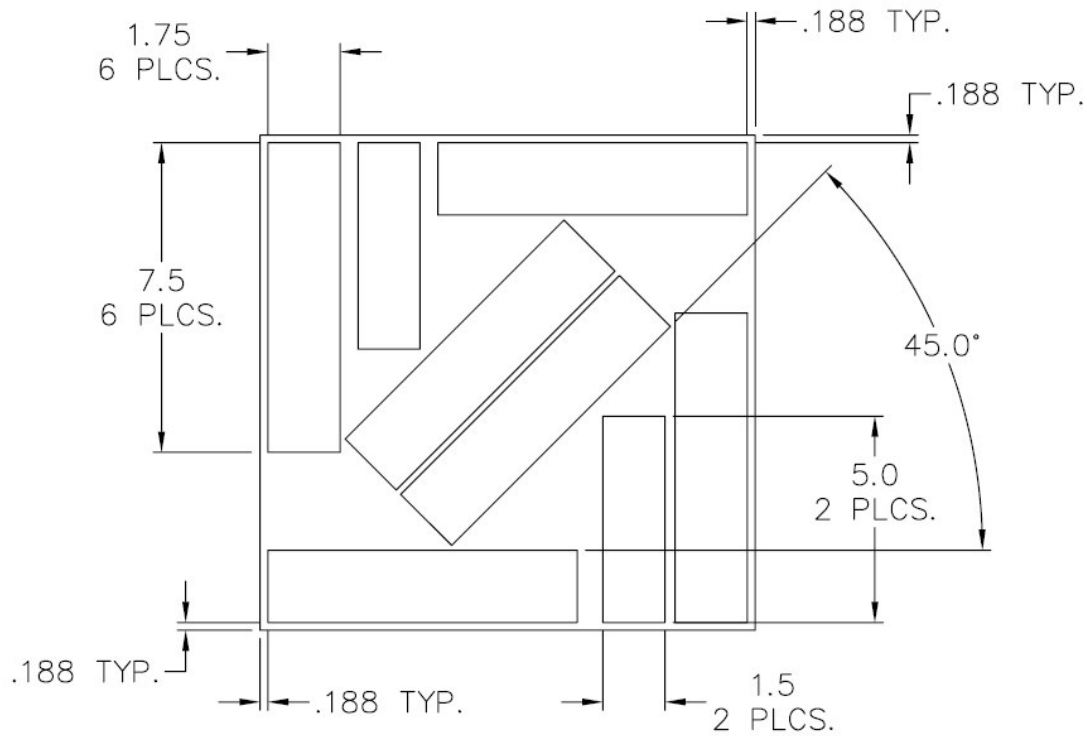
Layout for multi directional fatigue coupons (dimensions in inches)
